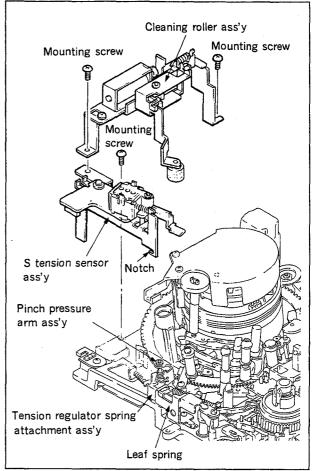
Removing the cleaning roller ass'y and the S tension sensor ass'y
